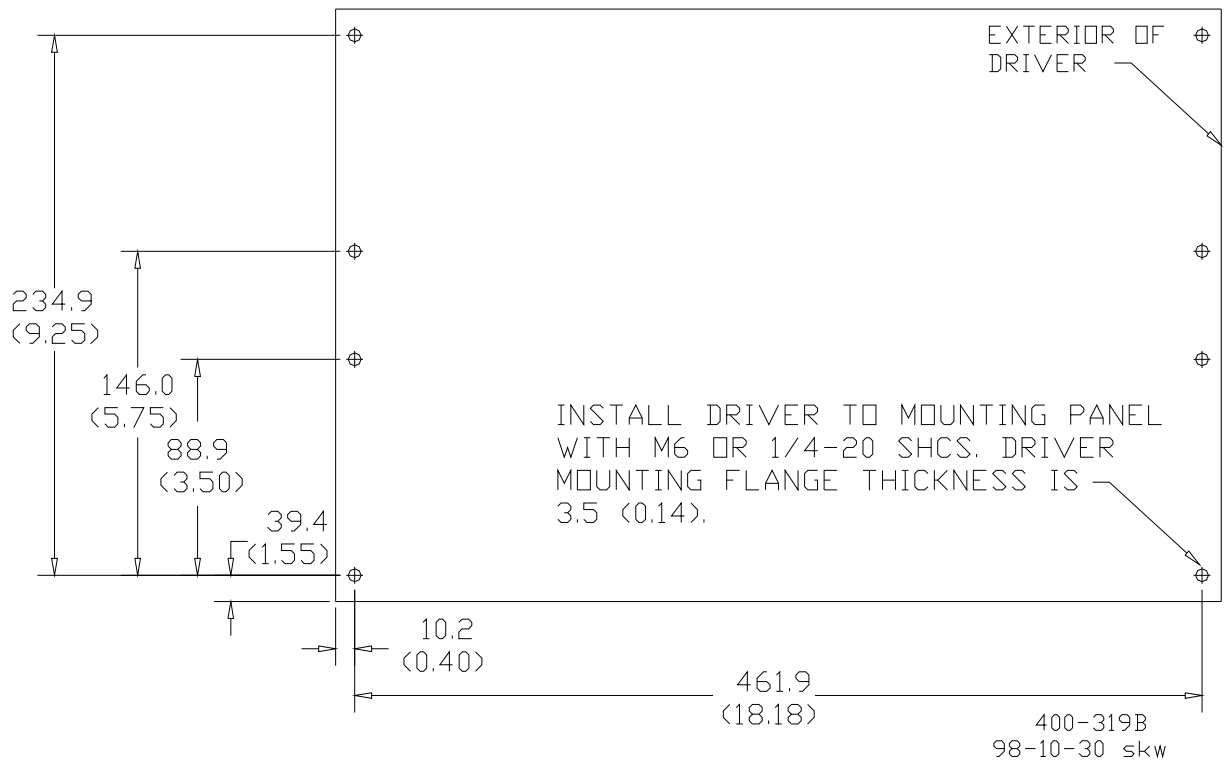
EM/LQ Driver Mounting Bolt Pattern
